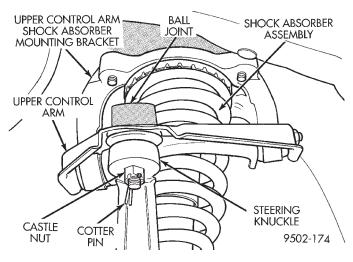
Upper Ball Joint Attachment To Steering Knuckle
